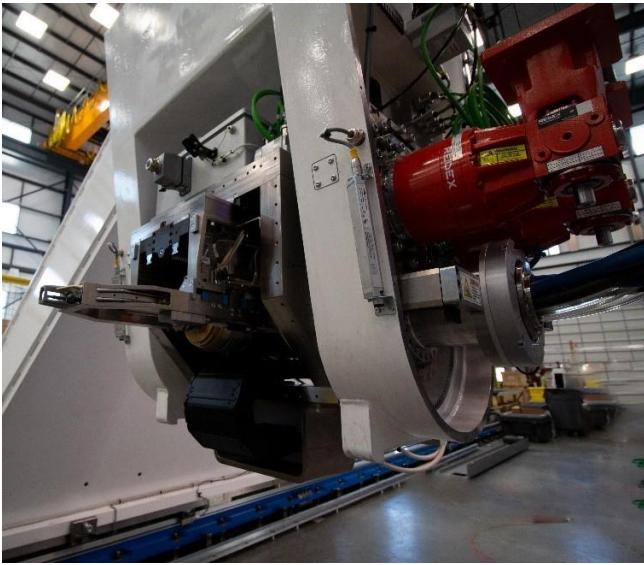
Machine head with removeable pressure foot installed for countersinking operations.
